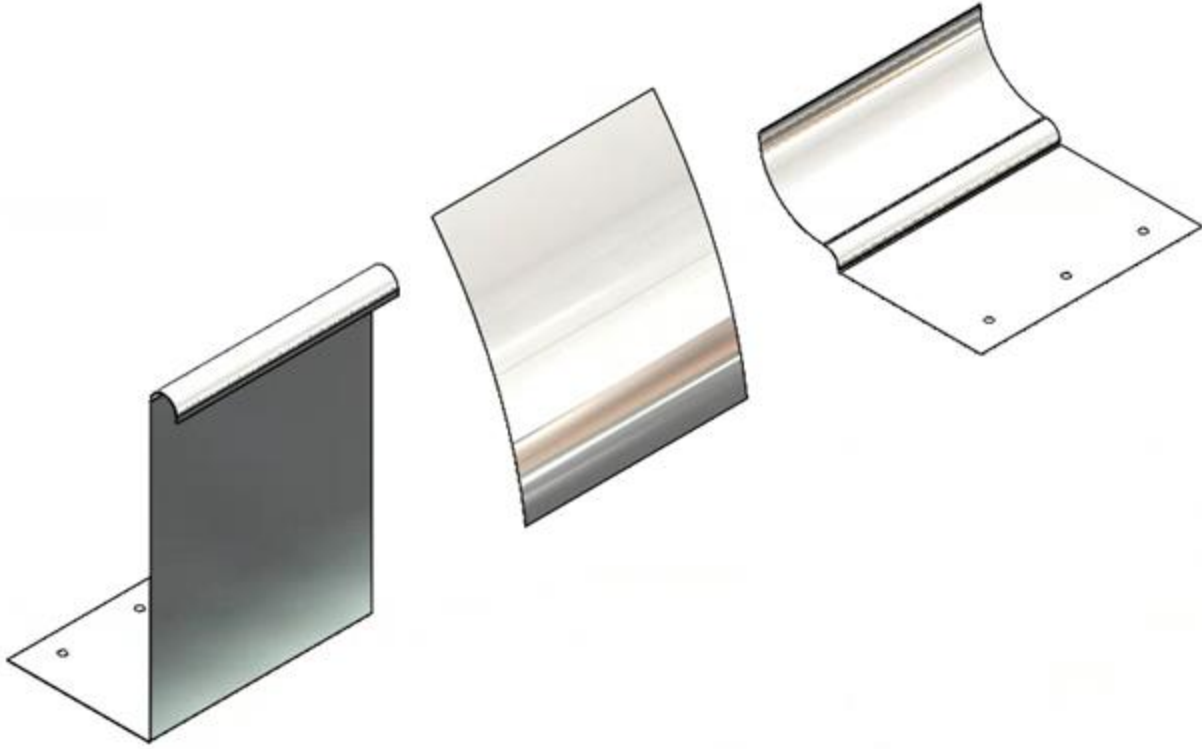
Optimized Weir Metal Pieces to be Welded
